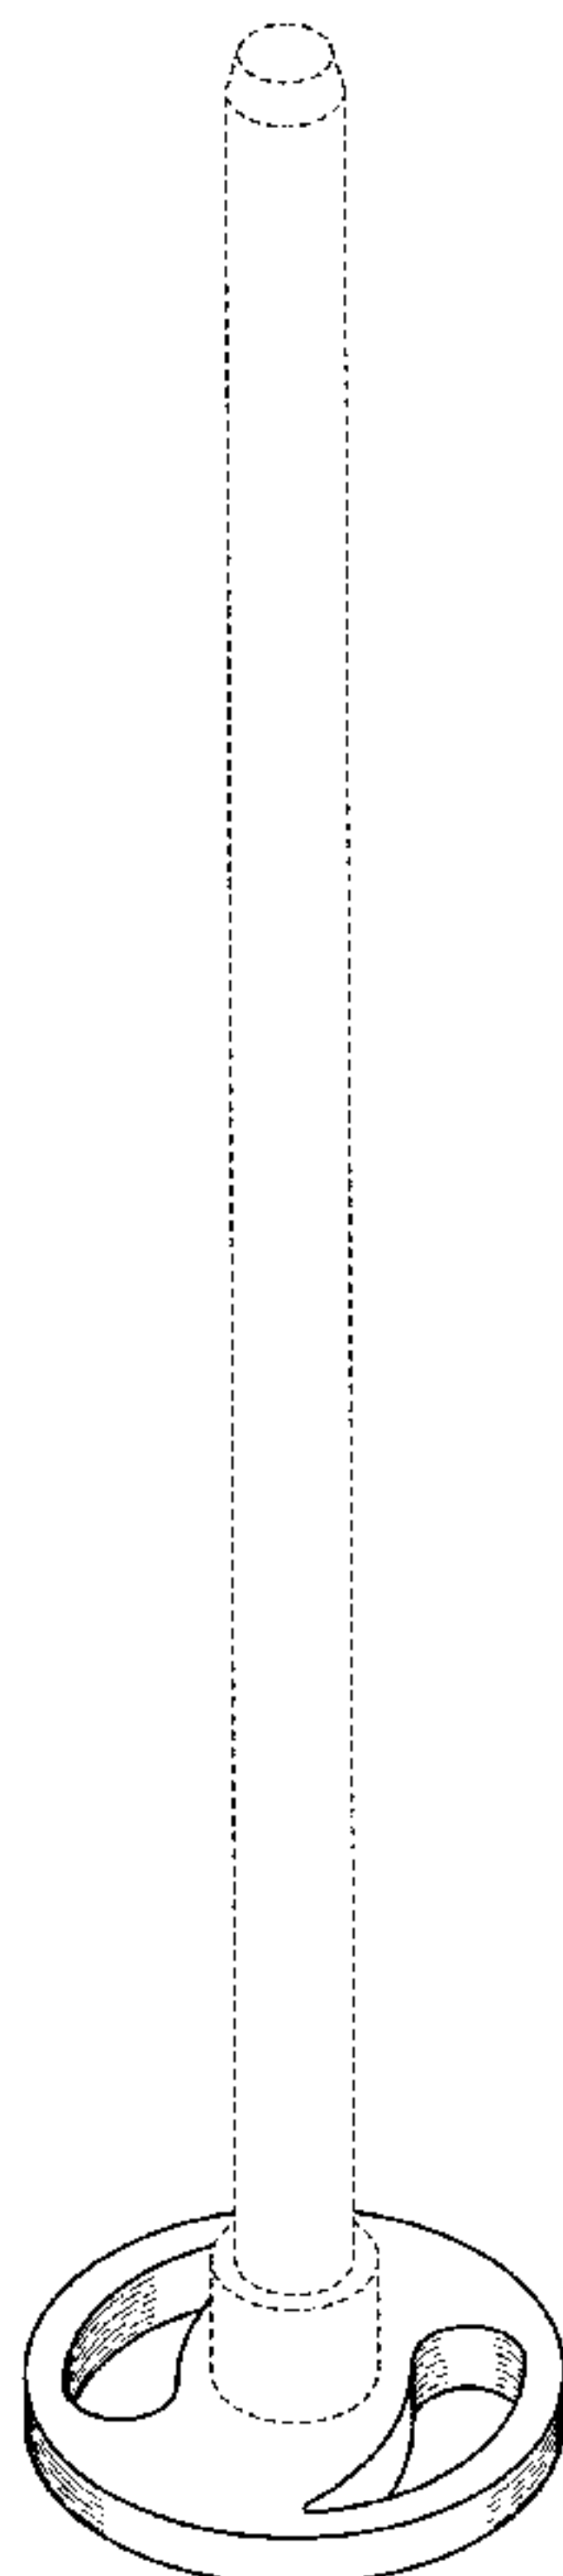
is a front side elevation view of our design; the rear side elevation view of our design is identical to the front side elevation view of our design;
